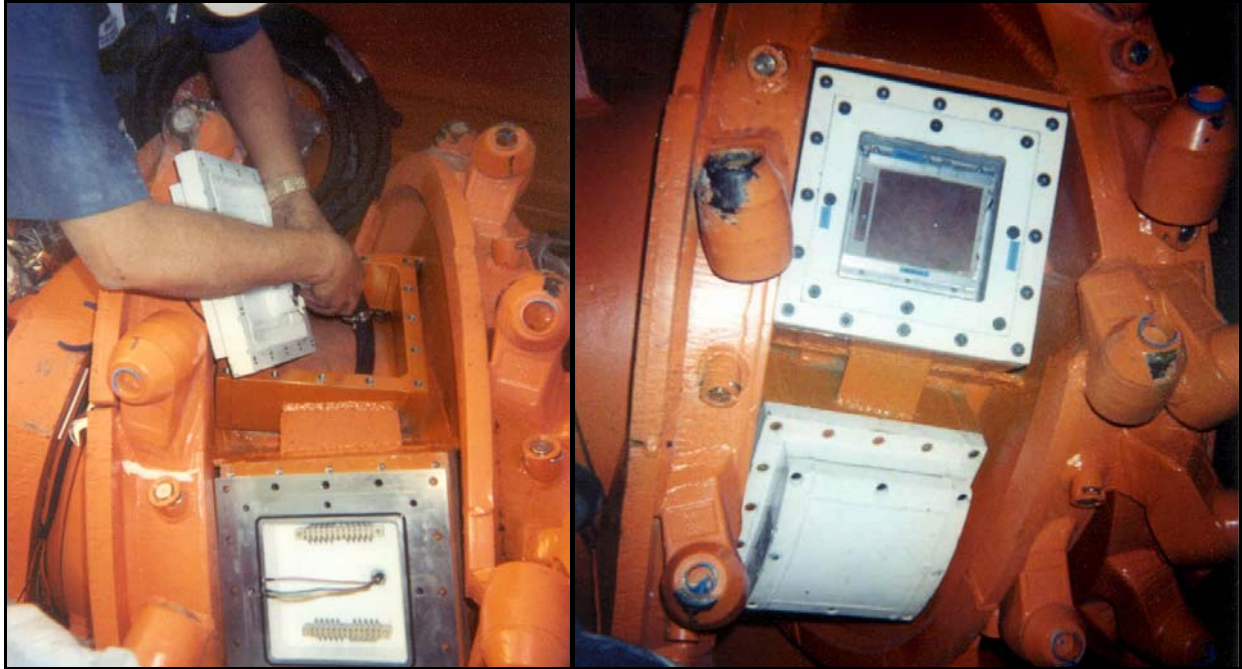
Component installation/wiring and completed final drum-system assembly
